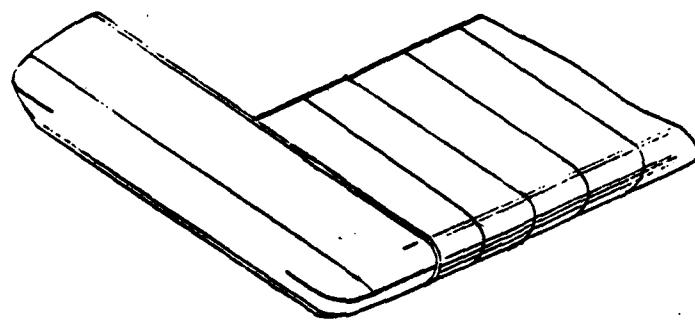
FIRST CENTER QUARTER PANEL ASSEMBLY
